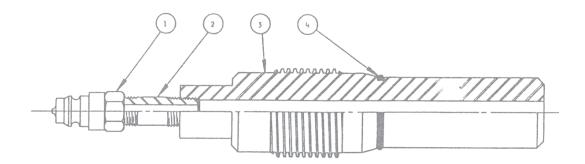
MH Weld & Seal Test Assembly (HA102019) HP Weld & Seal Test Assembly (HA102017)
